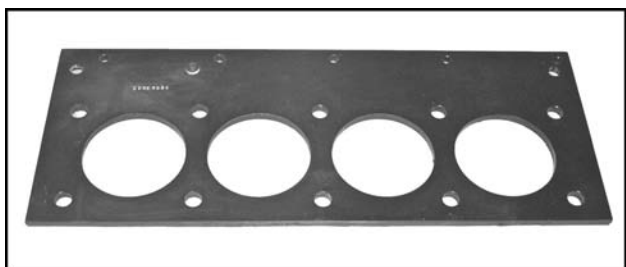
Cylinder Head Pressure Test Plate, ZTSE4534
